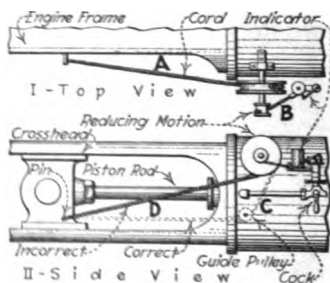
Incorrect and corrected methods of connecting indicator cord to crosshead.
